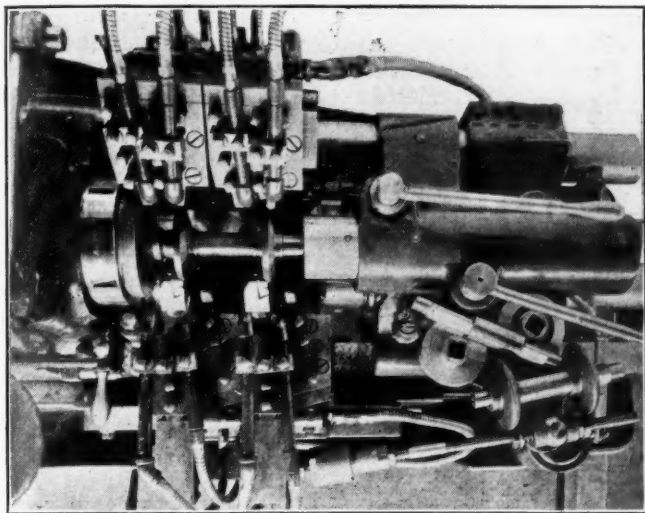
Differential side gears are turned completely by one operator and two machines at the rate of 125 pieces per hour.
